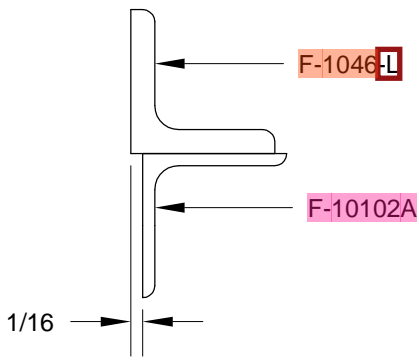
BAGGAGE DOOR SEAL ANGLE OFFSET
